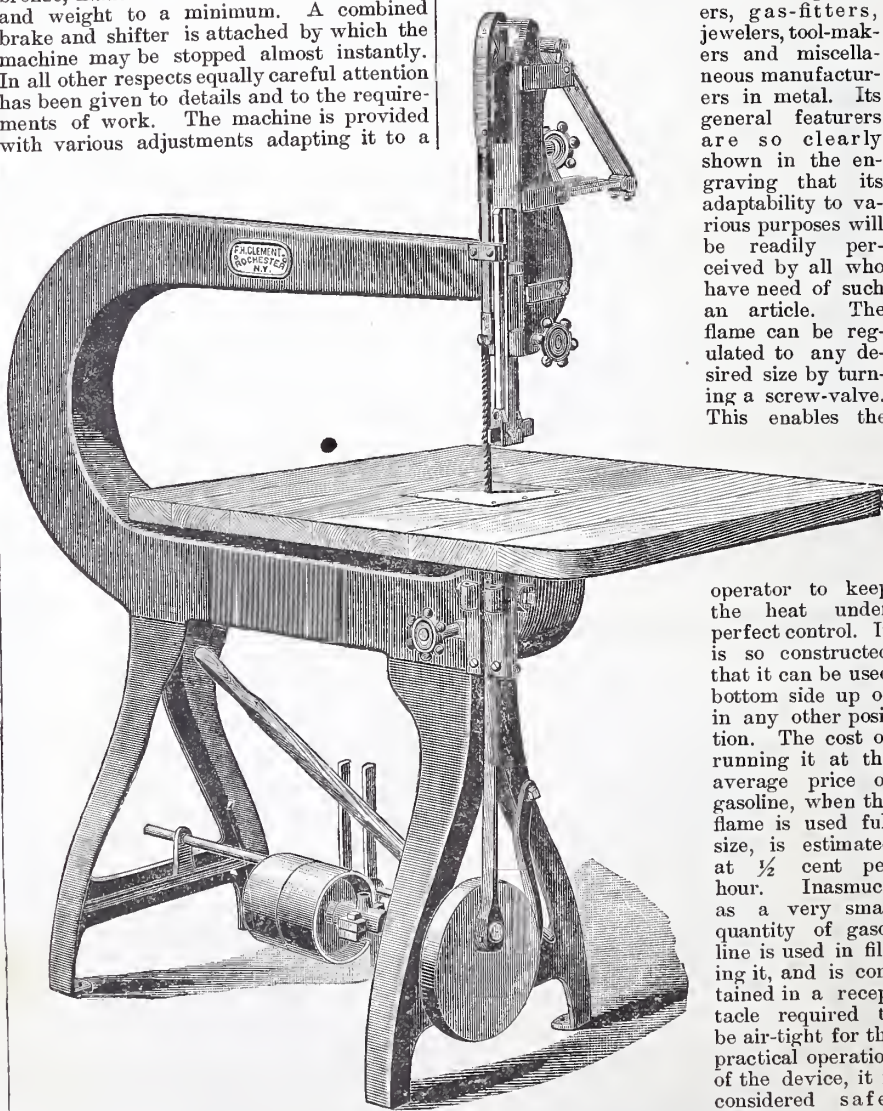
New Portable Scroll-Sawing Machine, Built by Frank H. Clement, Rochester, N. Y.
